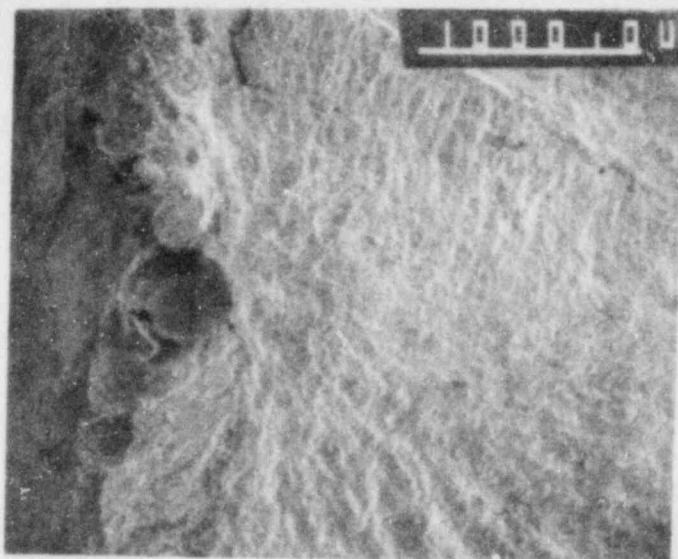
SEM fractograph depicting the fracture face of specimen MT 46. The photograph clearly shows the crack initiated at pits on the inside surface of the steam generator and has the general characteristics of a progressive or fatigue-like fracture.
